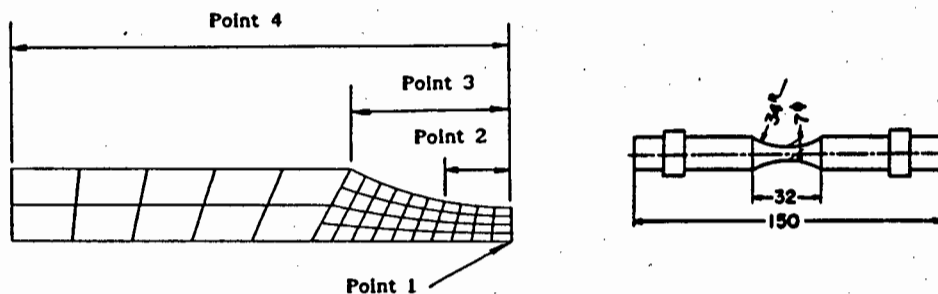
Hourglass specimen ; geometry and mesh details
